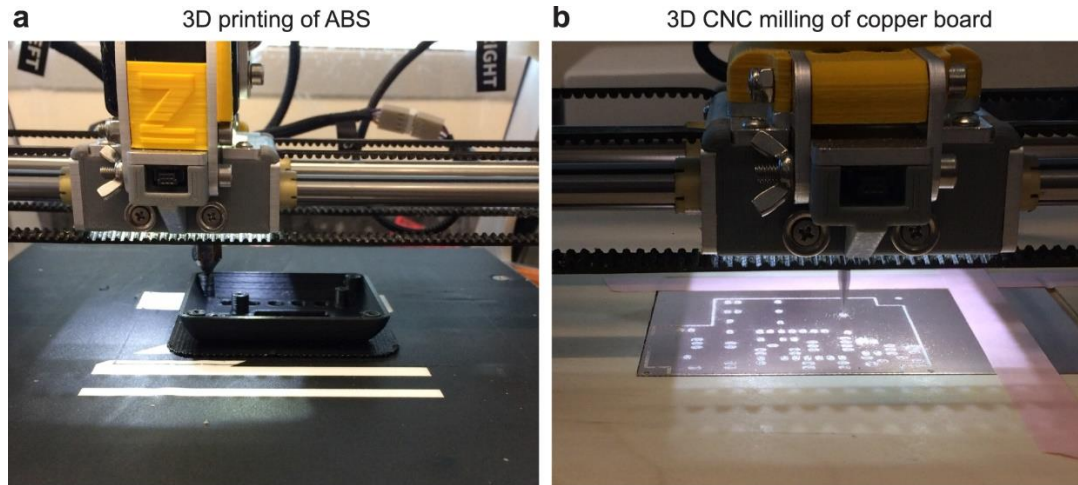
Photographs of 3D printing and 3D milling of all the parts using a multitool 3D printer. (a) The faceplate is being printed with black ABS material on a heated bed. (b) The main board is being engraved using 3D CNC mill. © 2017 PLoS
